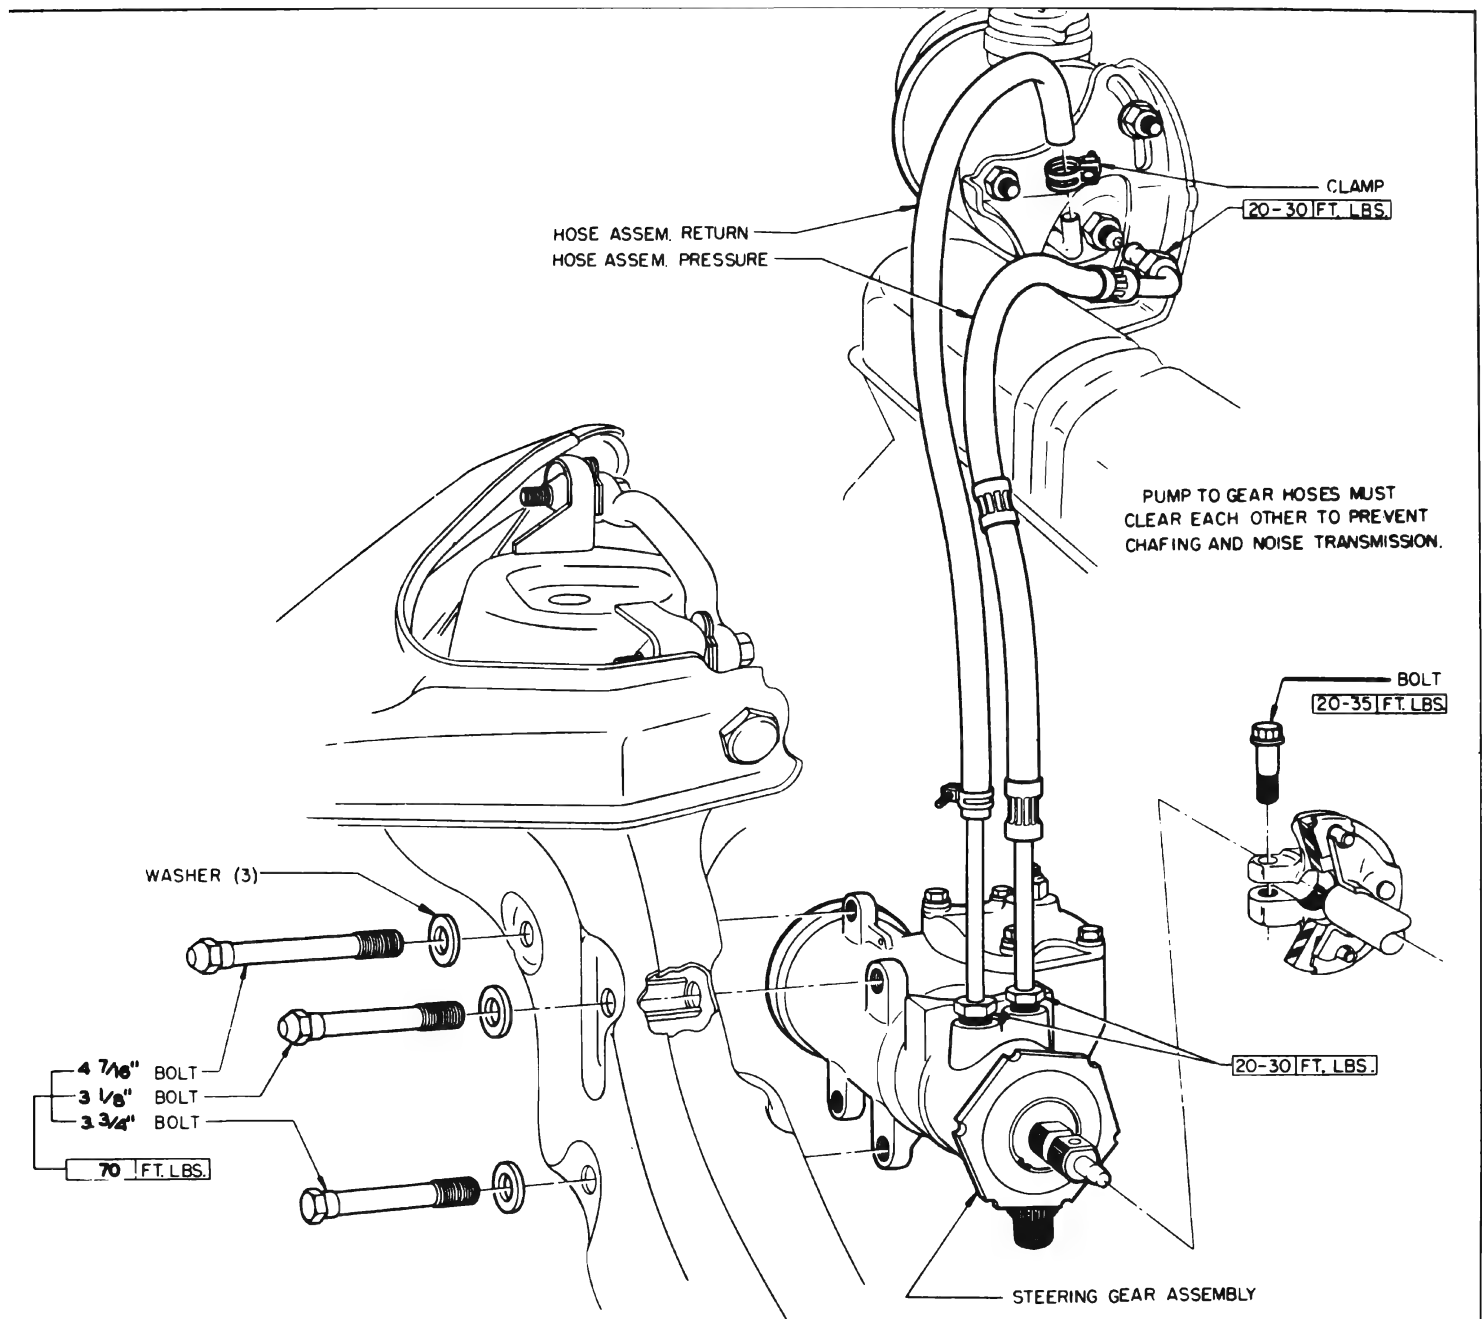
Power Steering Installation - 4400-4600-4800 Series
